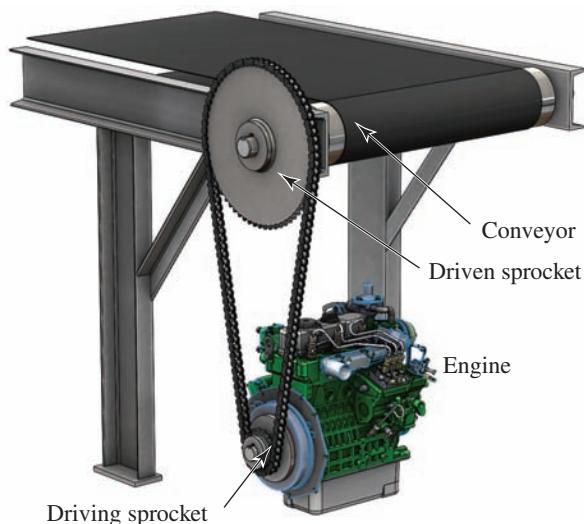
Chain drive for a heavy-duty conveyor for Example Problem 7-5
